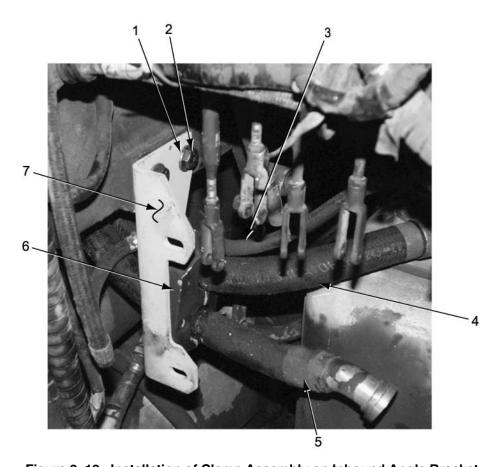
Installation of Clamp Assembly on Inbound Angle Bracket
